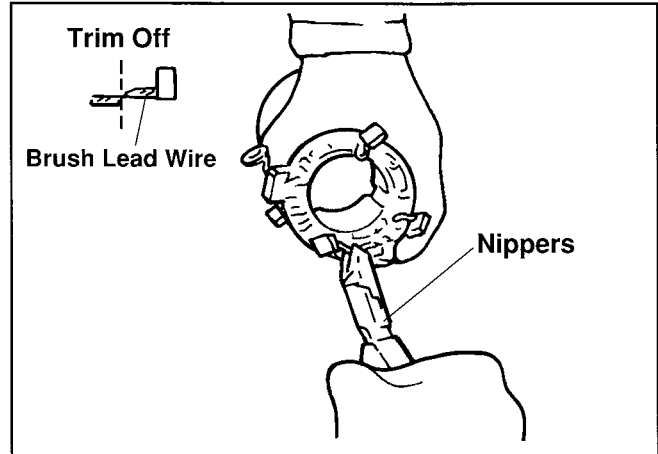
Cutting Brush Lead Wires From the Frame Posts.
